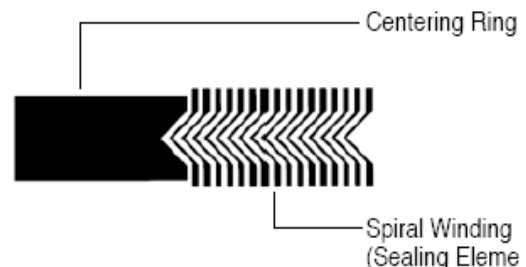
Cross sectional view of spiral wound gasket with outer centering ring [3]
